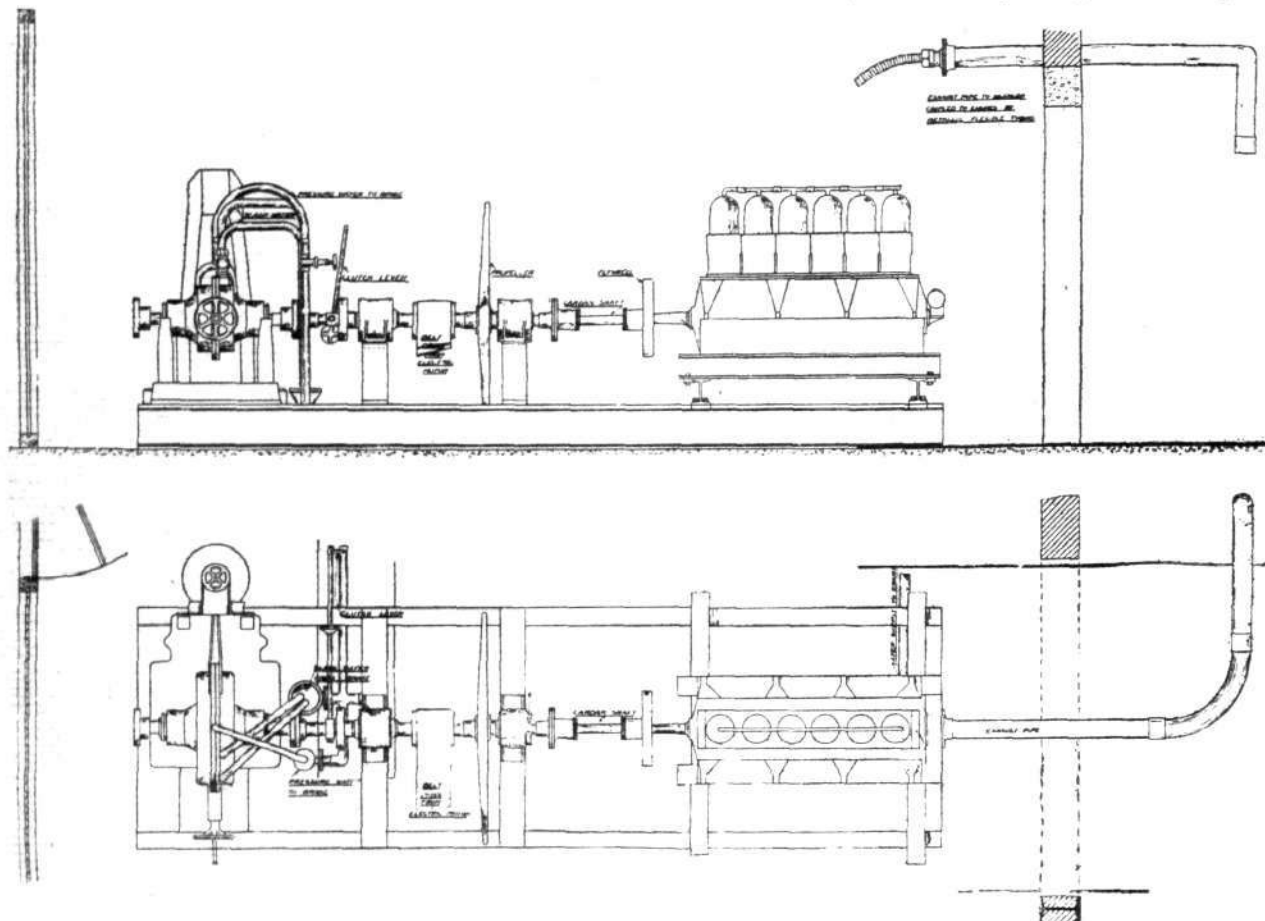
Arrangement of testing bed showing the engine, fan and brake in position, but with the air ducts removed.
